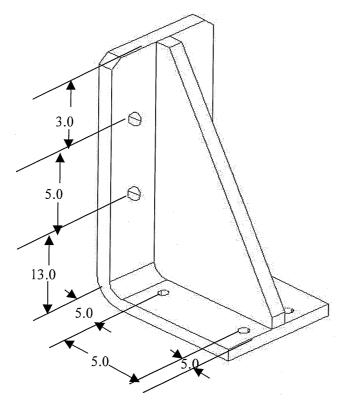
Sketch of Bumper Bracket (See drawing 25I166 for details.)
